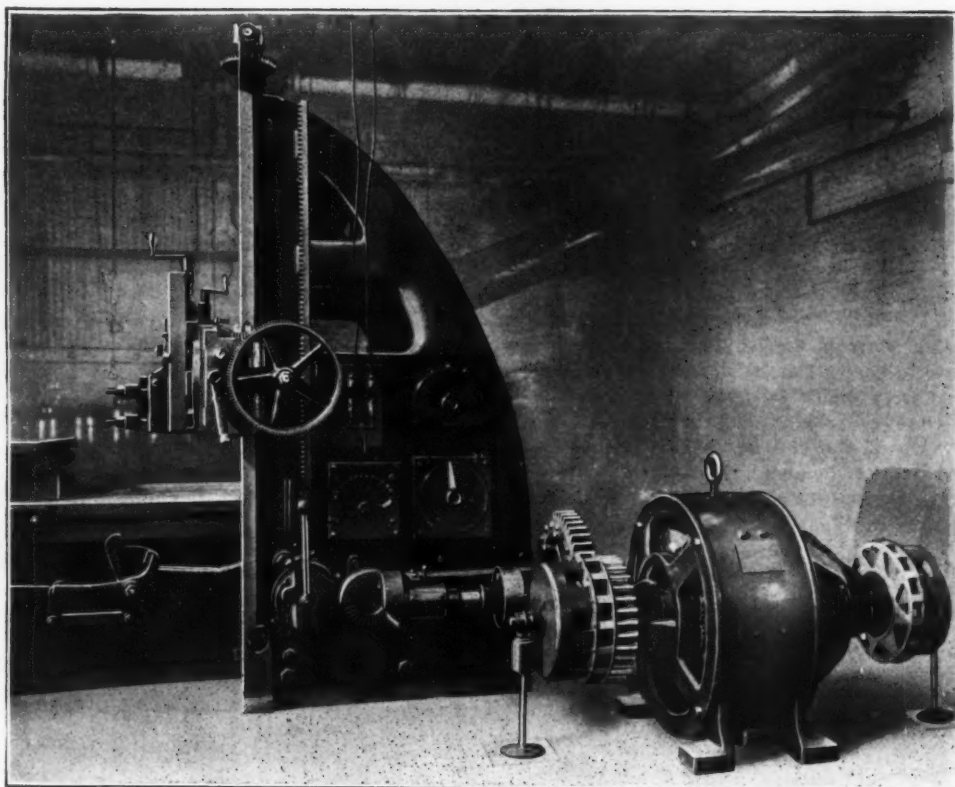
A Planer Equipped with the Induction Clutch Reversing Gearing.
